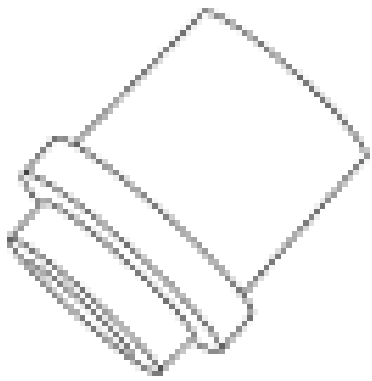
Installing Crankshaft Pulley Using Special Tool (303-102)
